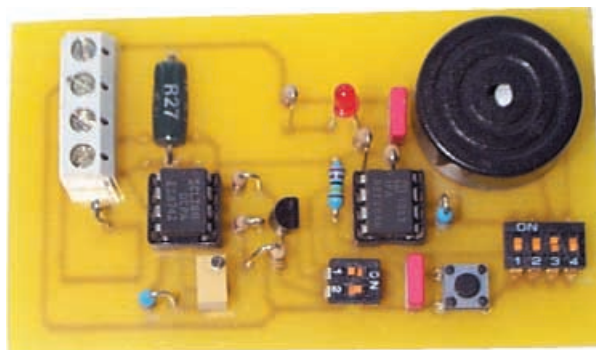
(above). Printed circuit board component layout and full-size copper foil master. The completed board is shown in the photograph.
